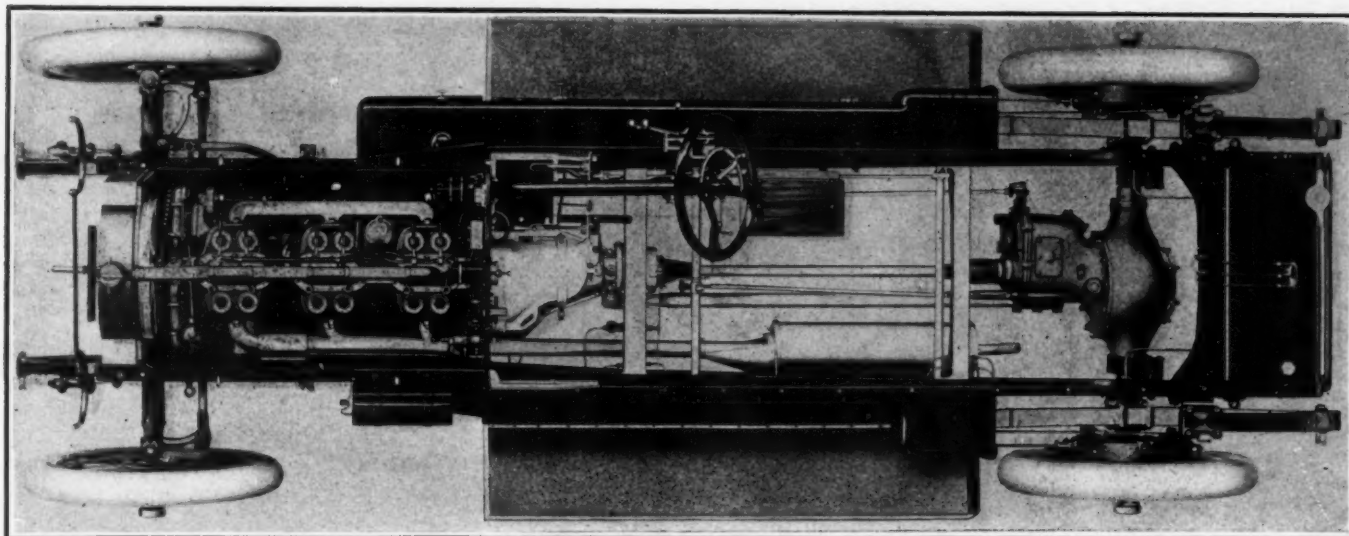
Packard six-cylinder chassis for 1913—attention is directed to the clean running boards, the battery box now carried on the frame under the driver's seat and the gasoline tank located beneath the chassis at the rear
